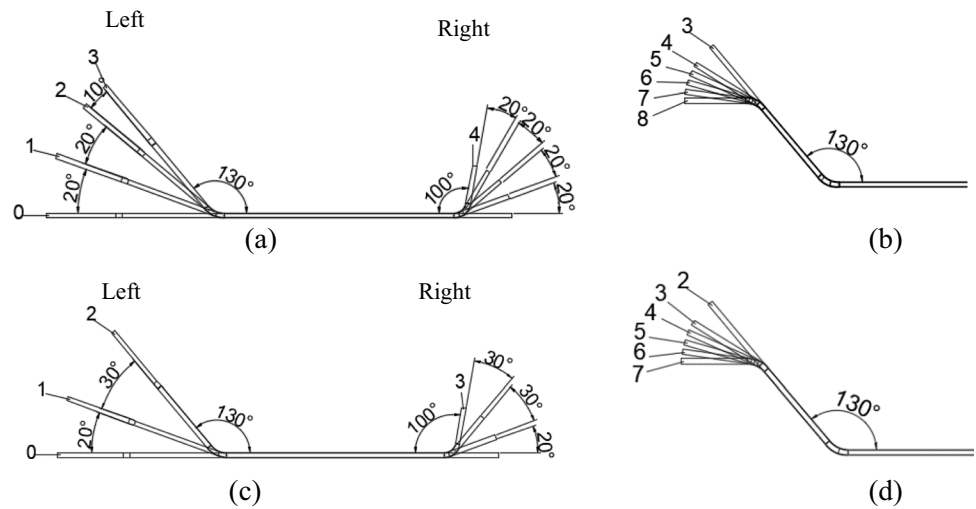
The roll tooling that was used to form a the left and right flanges, b the top hat on the left flange
